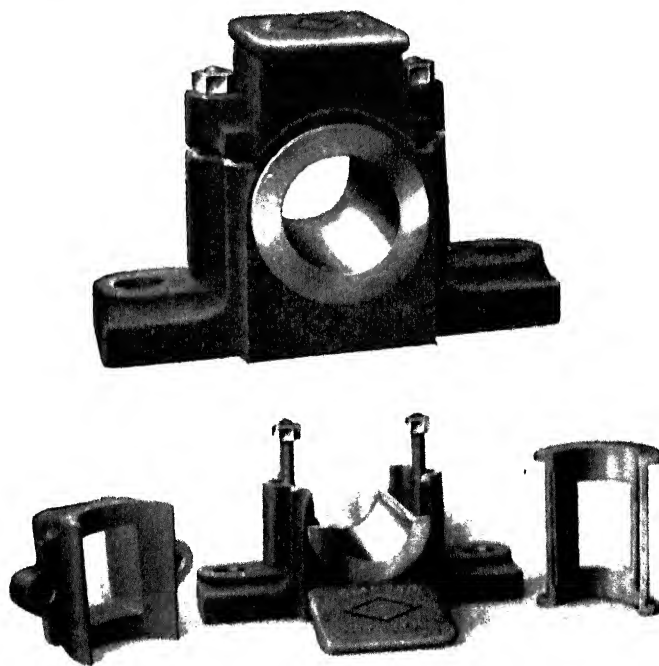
Diamond Grease Lubricator. Diamond Lubricating Co., Ltd.
